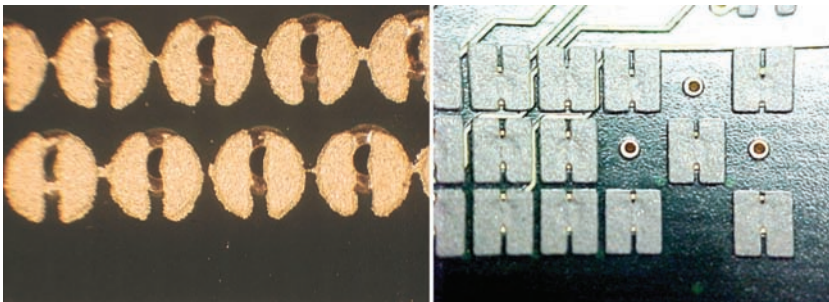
Split paste deposit design (left). Two completely separate half-moon deposits on opposite sides of the plated through-hole pad (right). Both deposits are joined together, straddling over the surface of the through-hole. Both of these aperture designs provide a point of reference for manual lead insertion or alignment check on a placement process.
